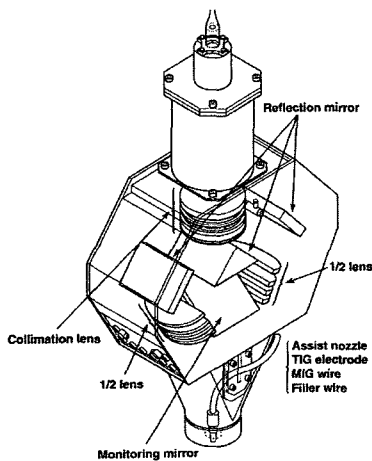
Coaxial type laser/arc hybrid welding torch<sup>23)</sup>
